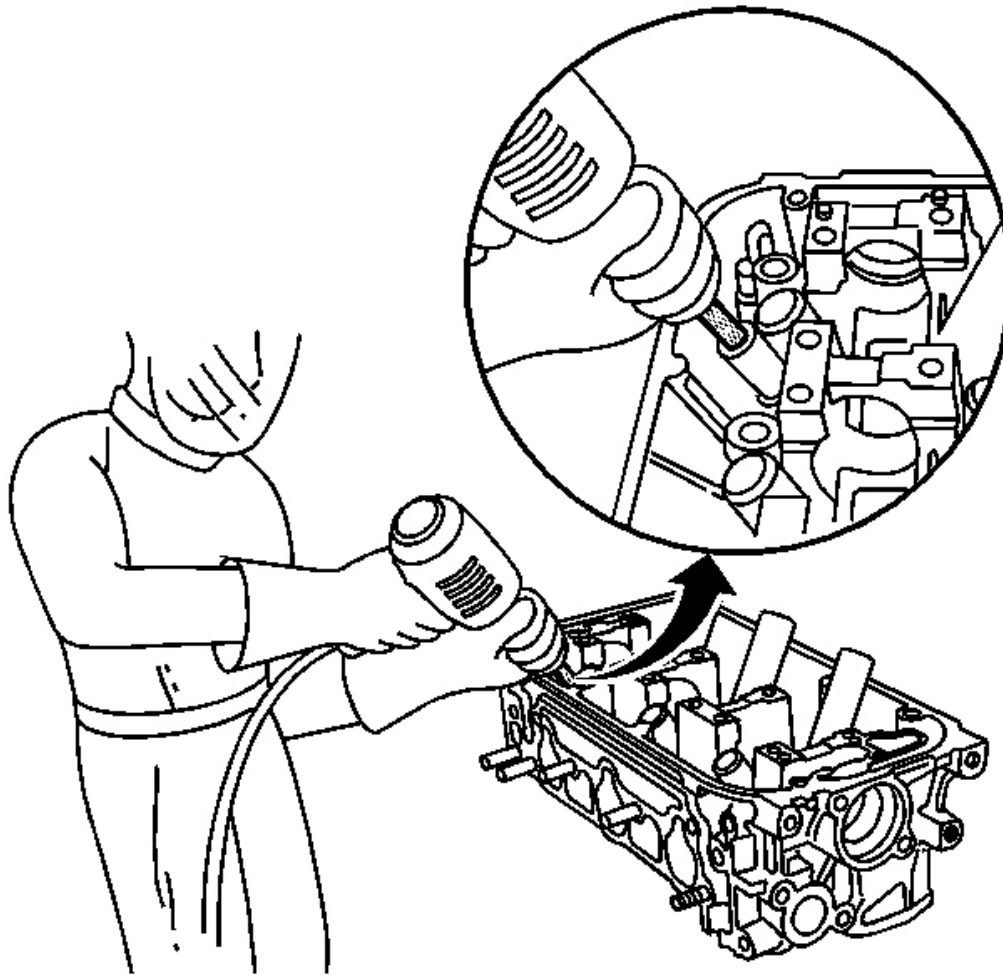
View Of Air Hammer To Drive The Guide Out Of The Cylinder Head
